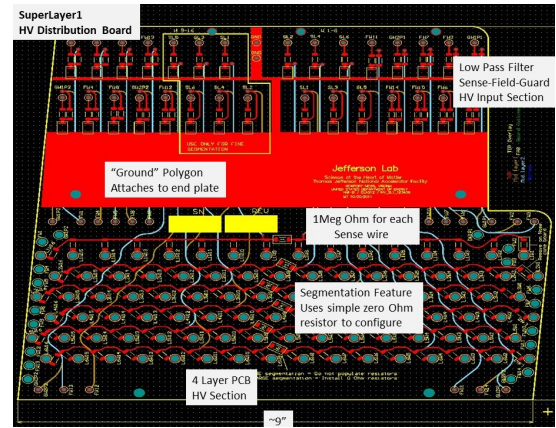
Board layout drawing for the High Voltage Translator Boards.
